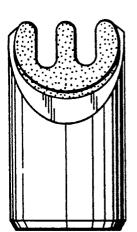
is a front elevational view of a stud-mounted polycrystalline diamond cutting blank showing my new
